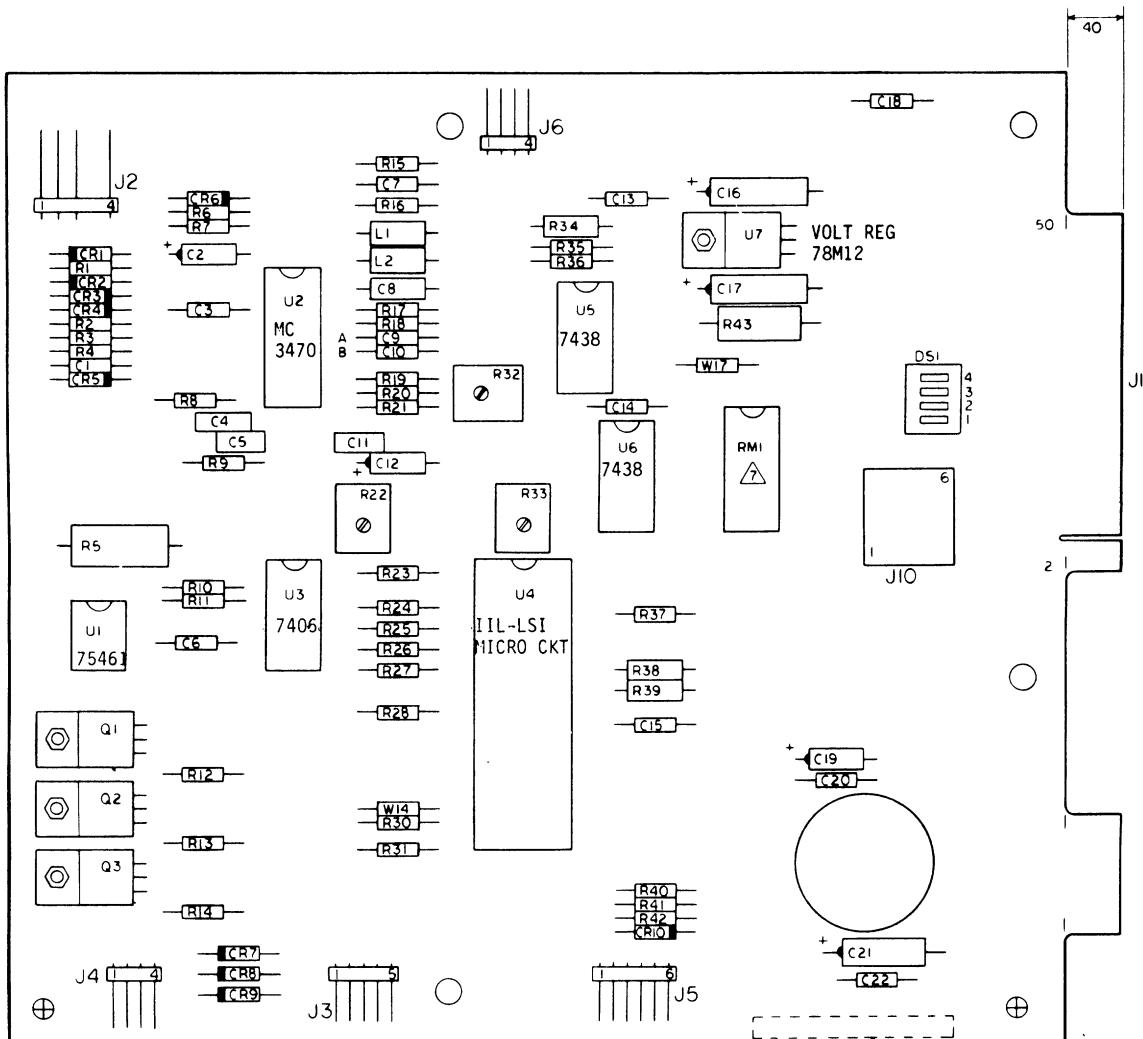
A. ASSEMBLY (SHEET 3 OF 3)
